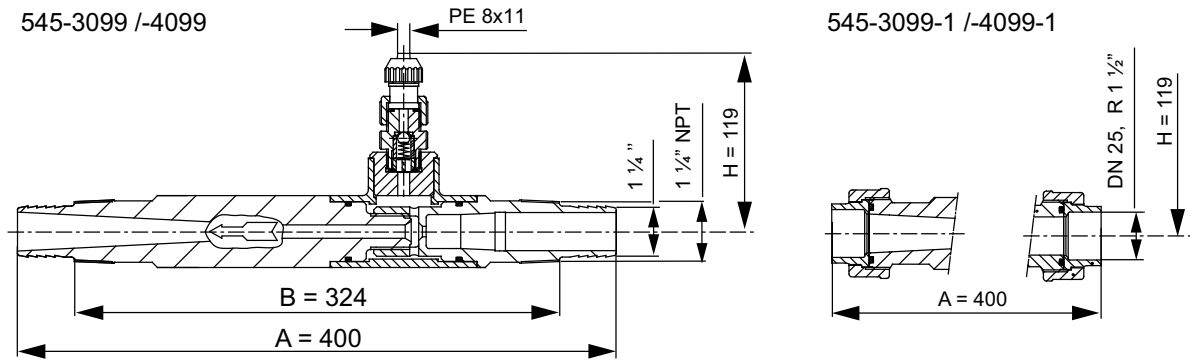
Dimensional drawings, 545-3099 to 545-4099 injectors
